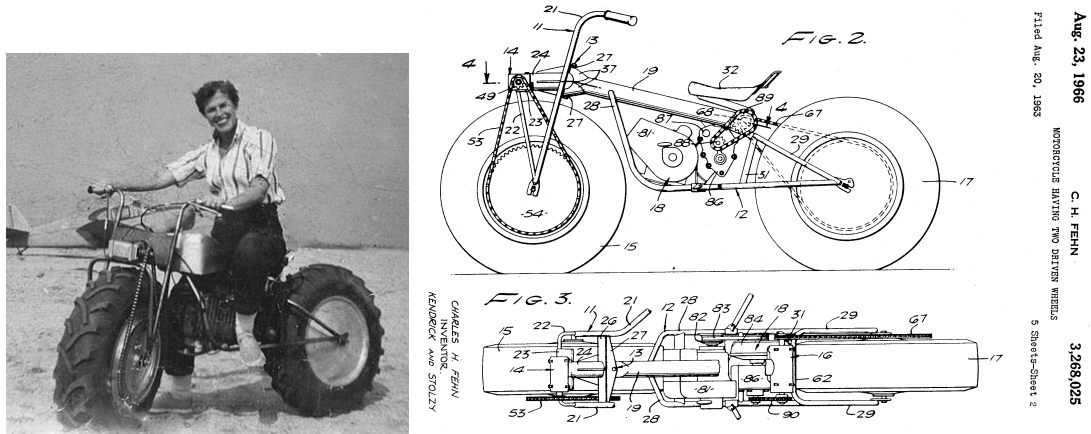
The first AWD motorcycle had mechanical system with chains to power the front wheel. On the right, original patent drawing of the vehicle [35].
